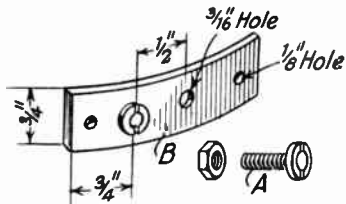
DIMENSIONS OF THE FIBRE INSULATING STRIP.
